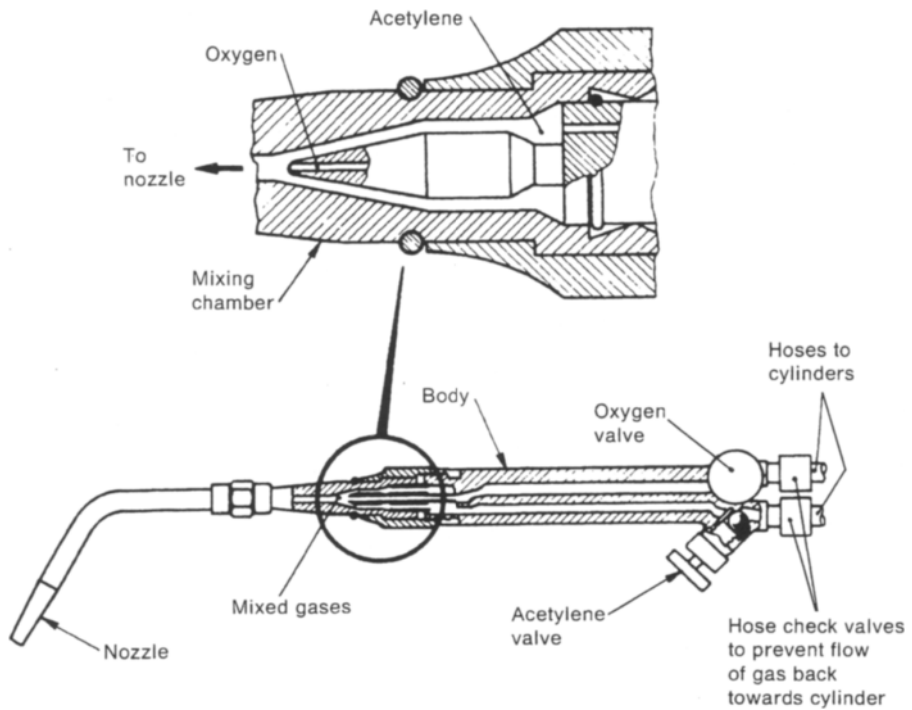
Torch for gas welding with oxygen and acetylene.
